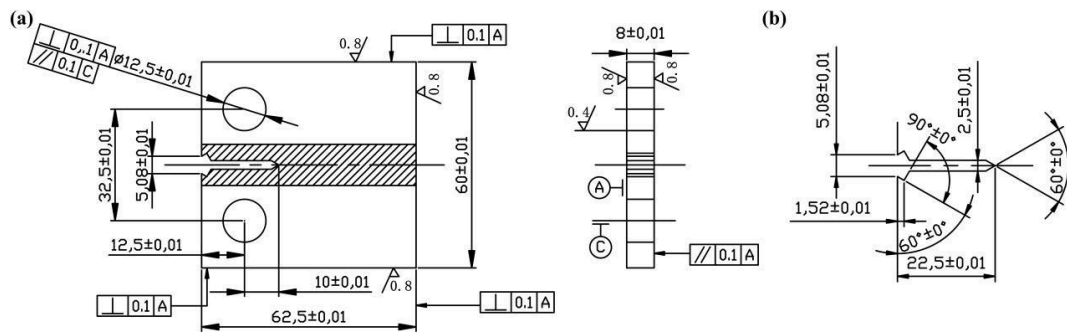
Dimensions of: (a) CT fatigue specimen and (b) Notch in the CT fatigue specimen.
